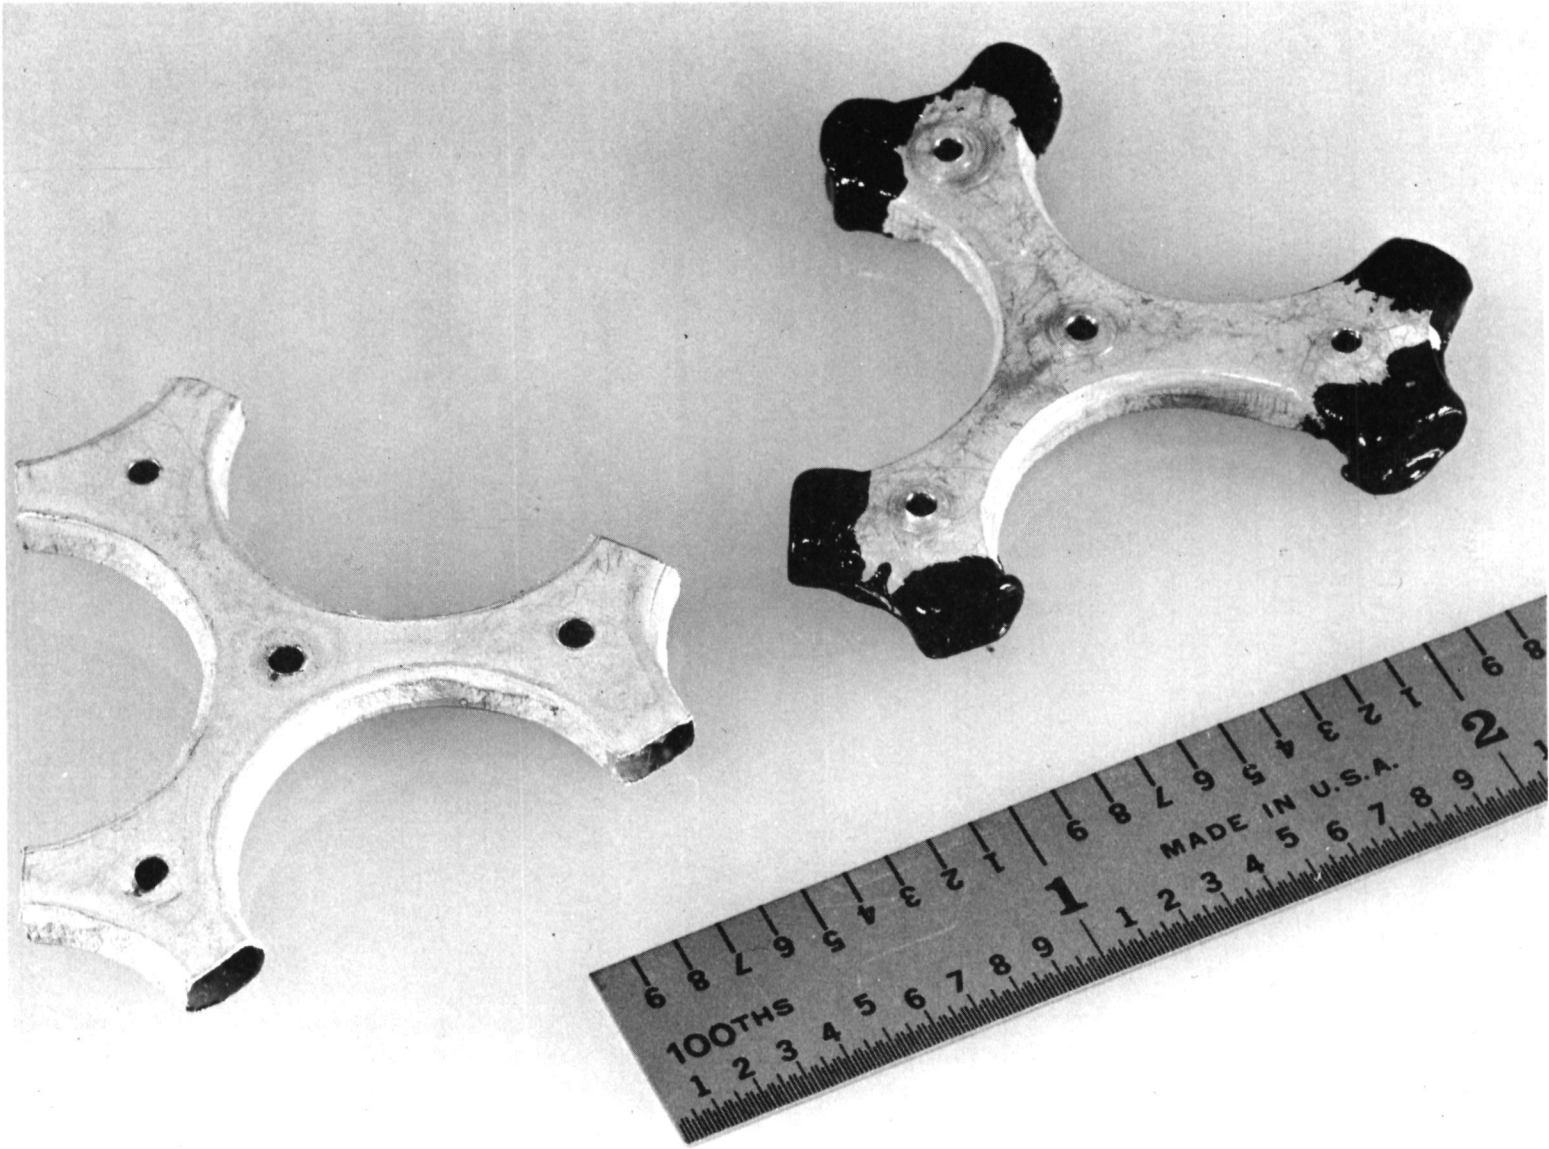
Samples of Hollowcore Panel, Masked with Ethylene-Propylene Rubber and Unmasked, Selected for Testing
